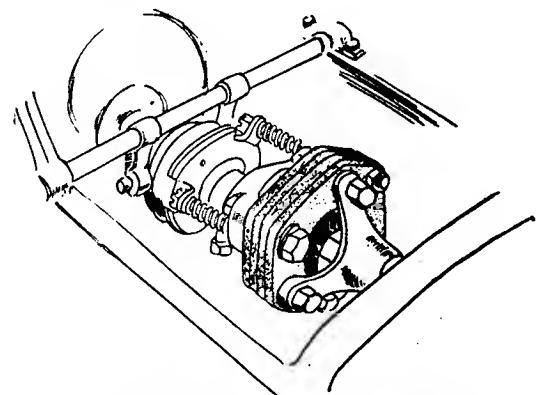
Leather joint used on the Jeffery car between the clutch and gearbox
